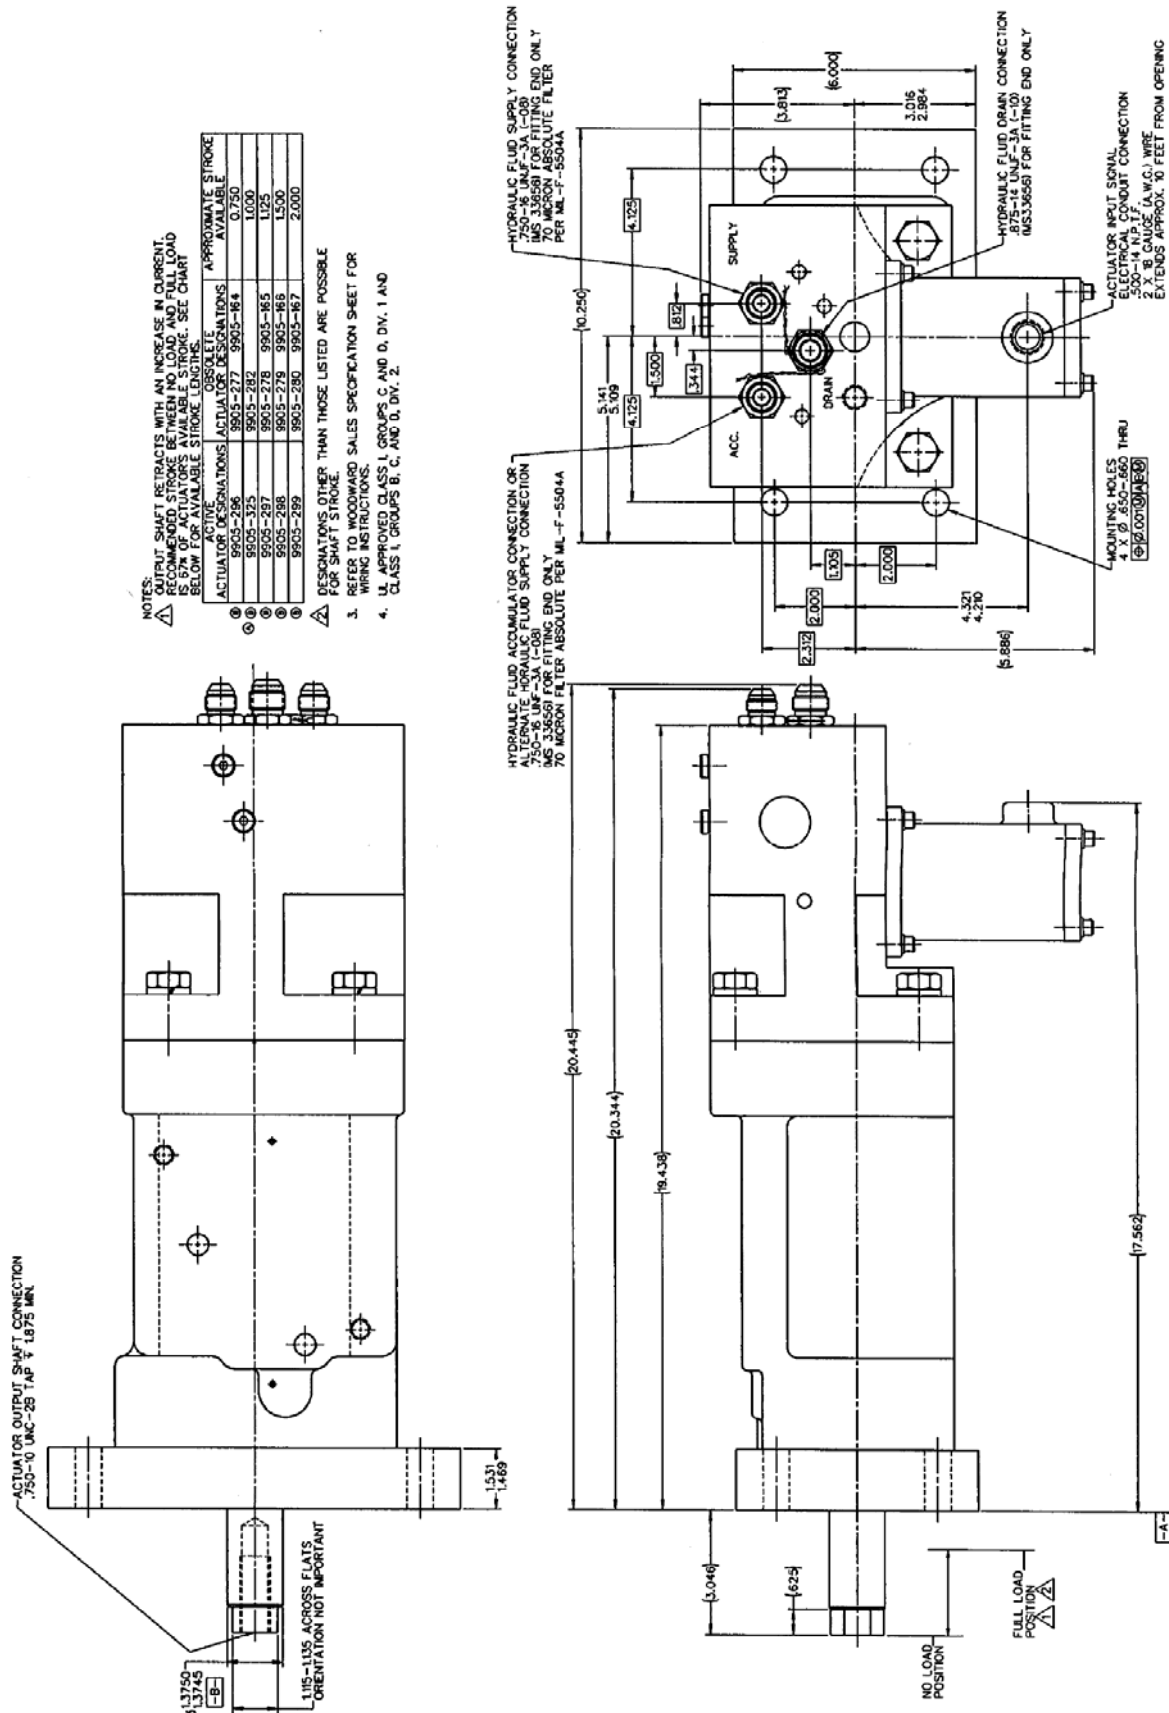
Outline Drawing of TM-1000LP Actuator
